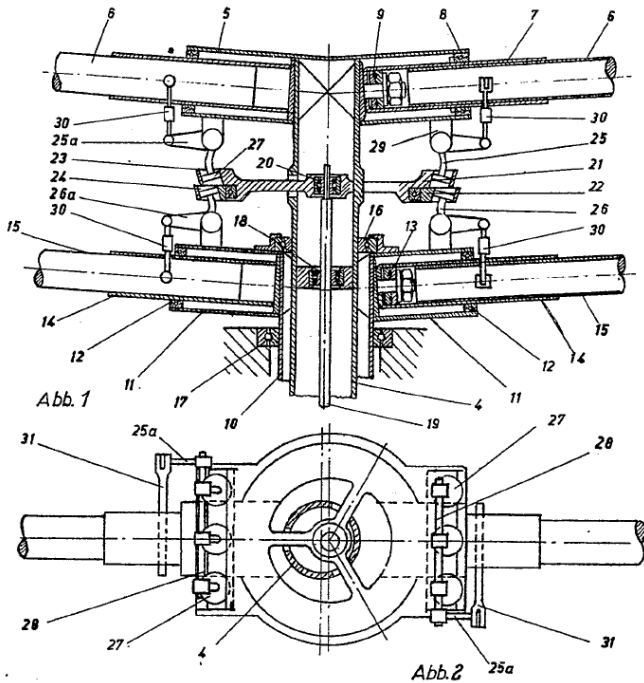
A last patent on a coaxial rotor blade pitch control mechanism, Ref. 113.
